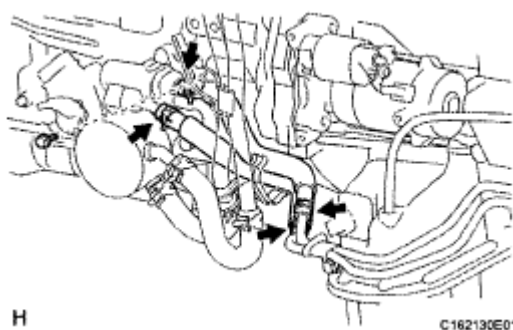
Identifying Inlet No. 2 Transmission Oil Cooler Hose And Outlet No. 2 Transmission Oil Cooler Hose
